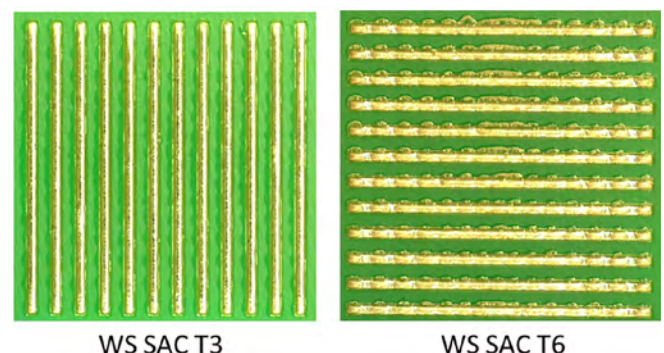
Wetting for WS SAC Type 3 and 6 solder pastes.
